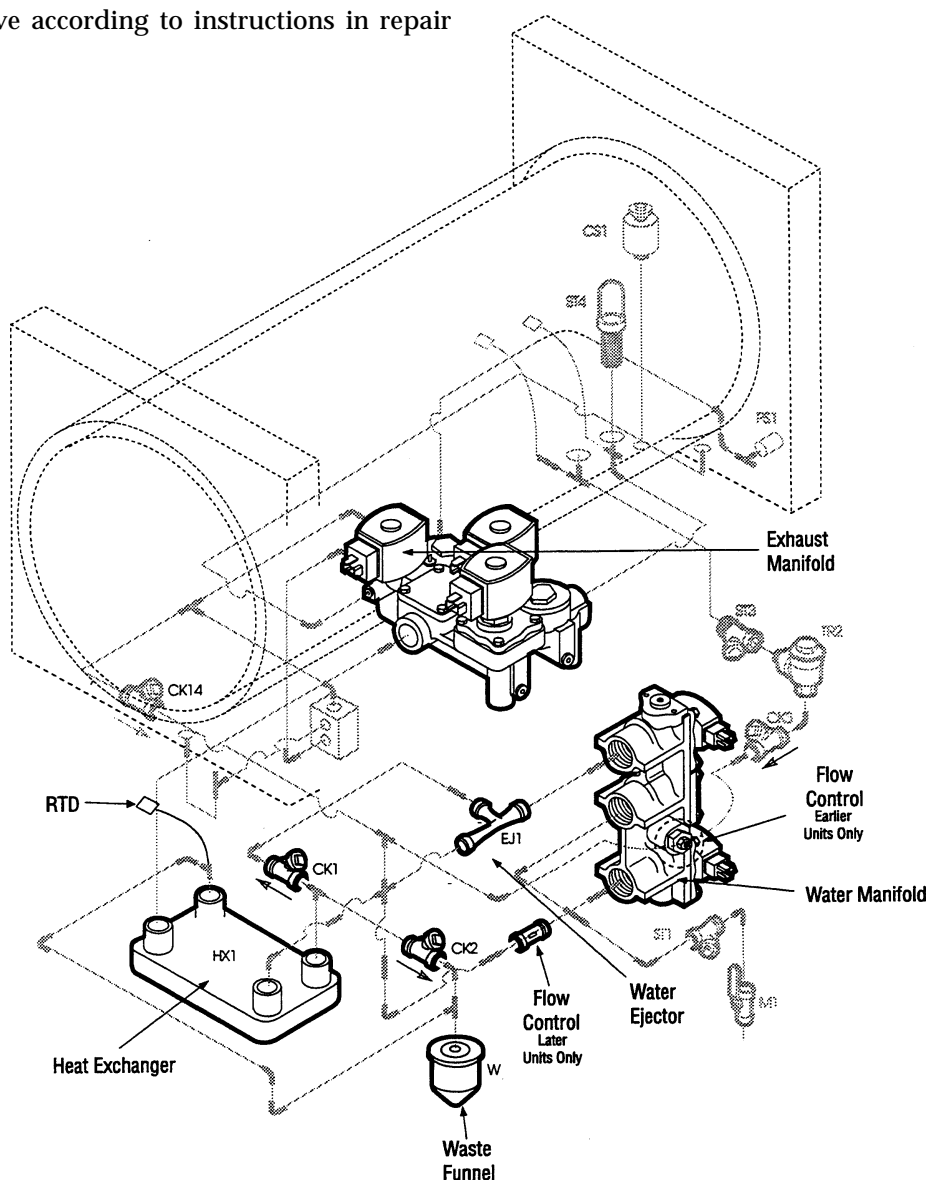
Location of Exhaust, Water Manifolds and Other Components
